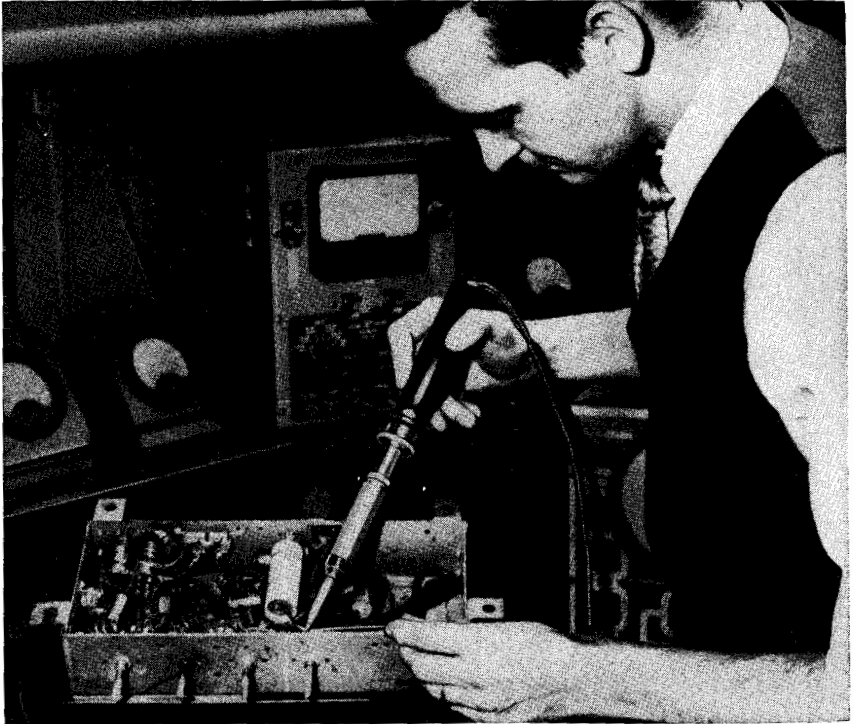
Using American Beauty electric soldering iron to solder a joint on a new condenser in a radio set. (American Electrical Heater Co. photo)
